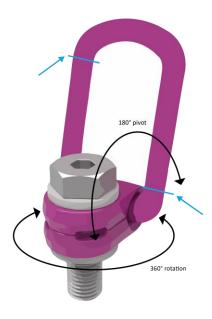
Similar Rud bolt on lifting point. Location of fracture indicated by blue arrows
